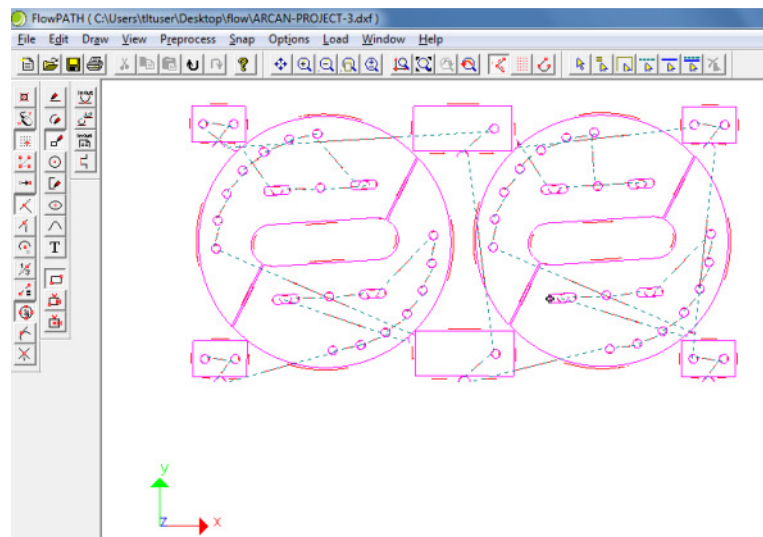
h. – Disposition of the pices in the steel plate before cutting. Flow path of the water jet machine.
